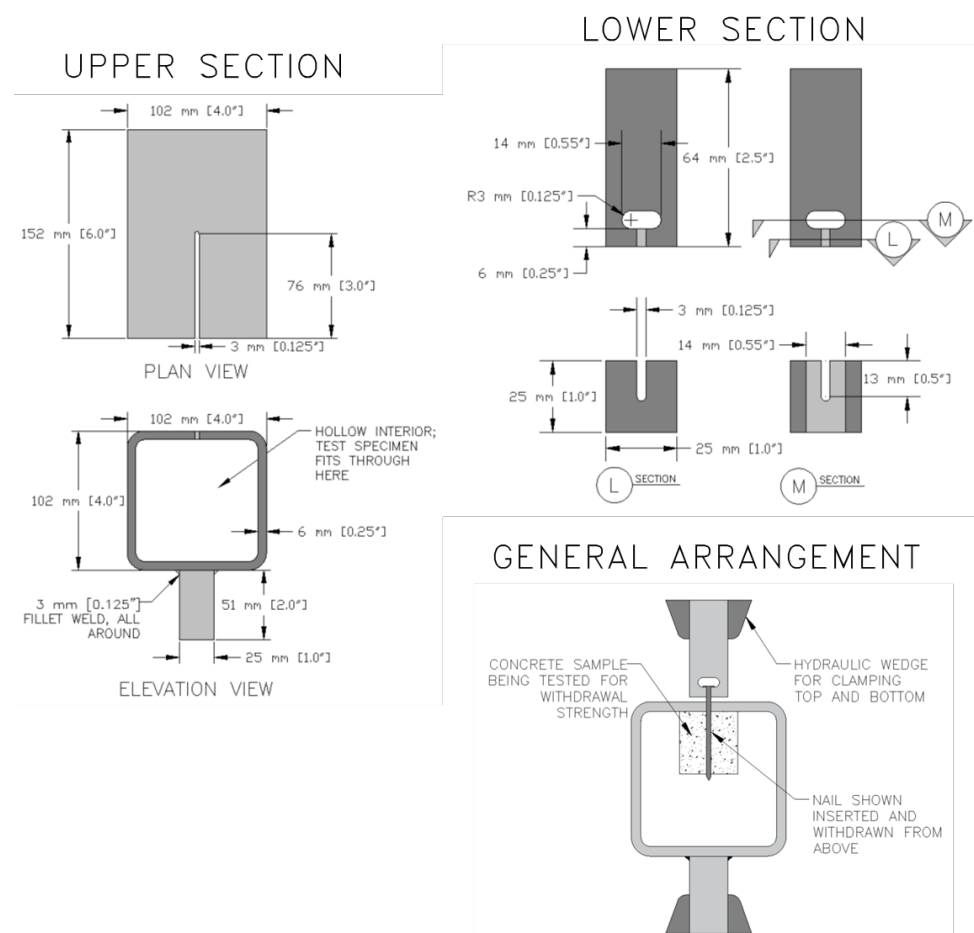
Details showing the dimensions of the withdrawal testing apparatus as well as a general arrangement detailing how the device fits within the hydraulic clamping wedges of the device.
